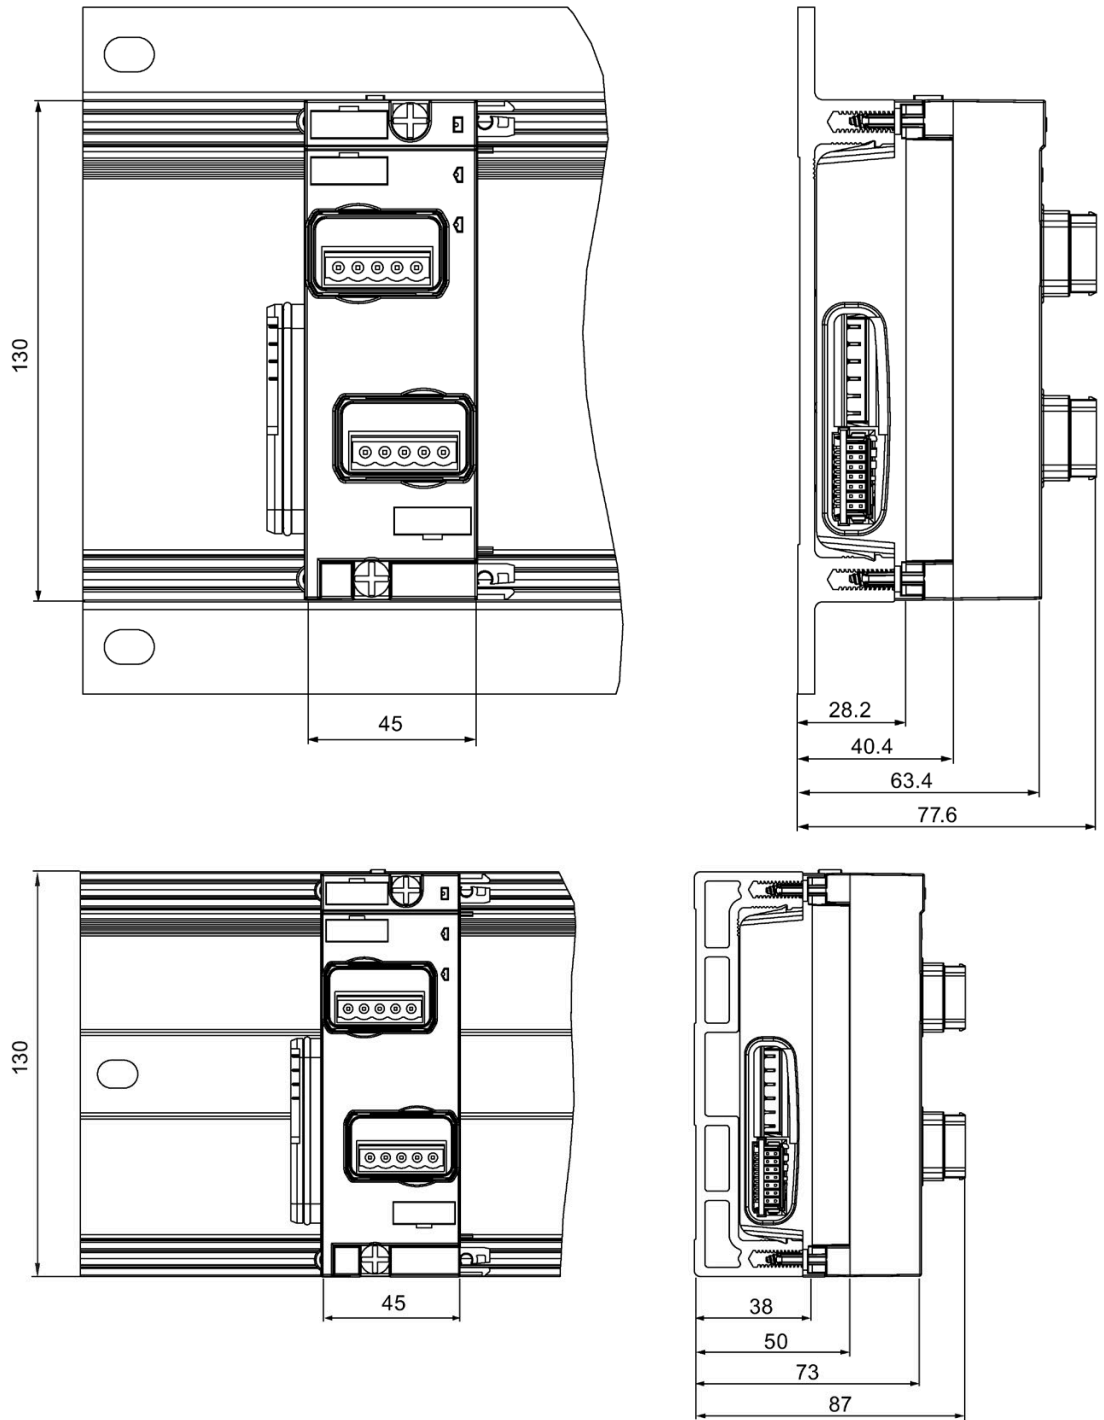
Dimension drawing of the outgoing module with CM PM-O PP connection module
